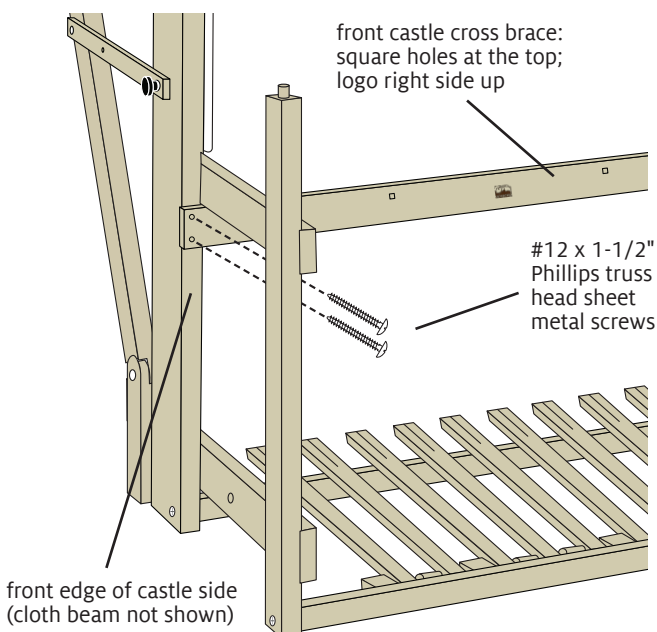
ATTACH THE FRONT CASTLE CROSS BRACE
